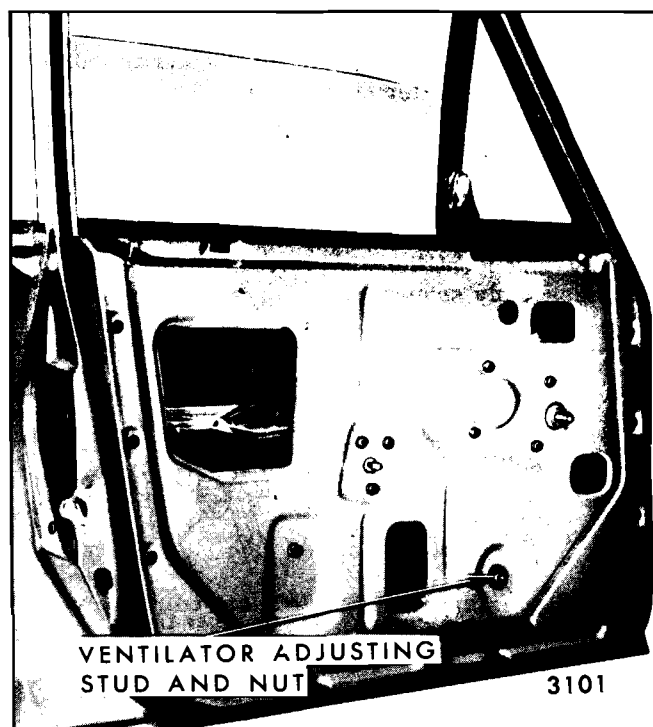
Front Door Window Removal and Adjustment - "A and X" Closed Styles
